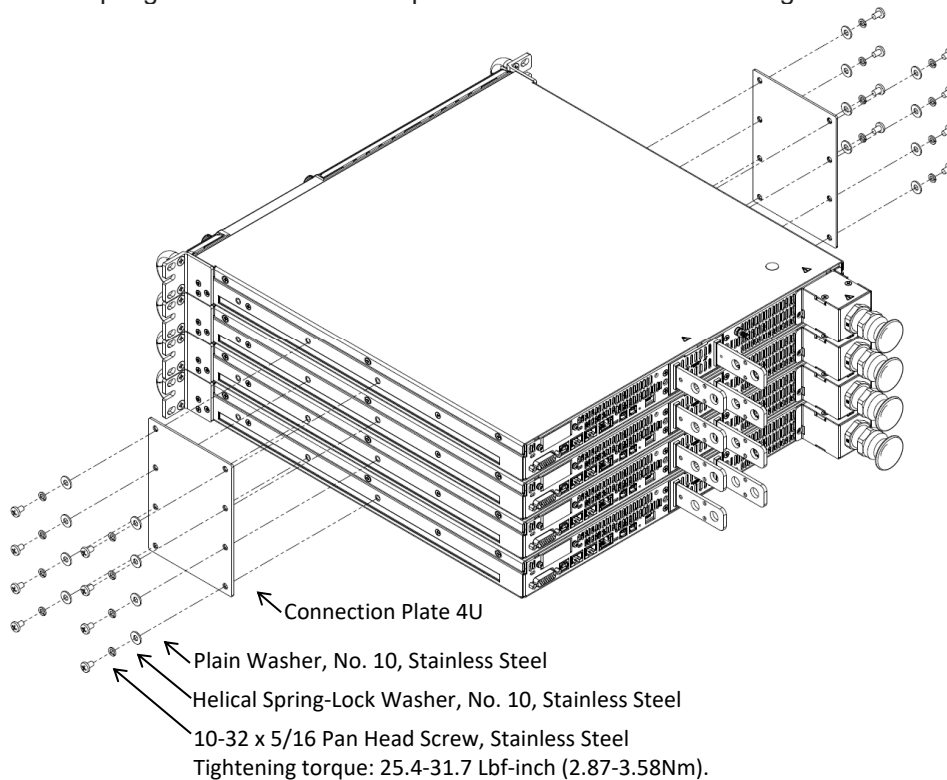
Four 10V-40V Units Connection Plates 4U Assembly
